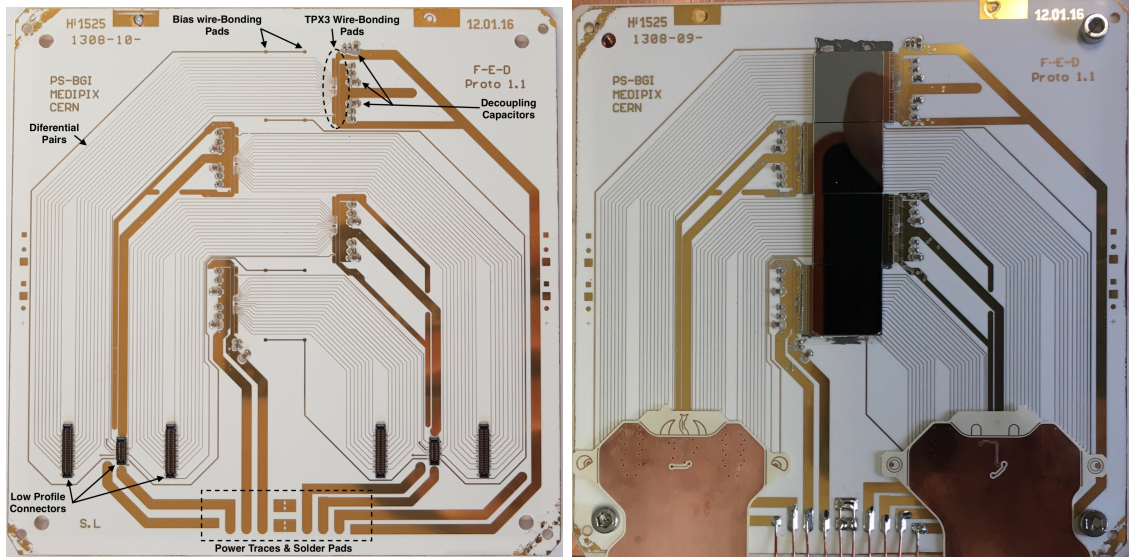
Left: Picture of a chip carrier board before assembly of the HPDs. Right: Complete chip carrier board with N-on-P assemblies. The flexible cables and the power delivery copper wires are visible at the bottom.
